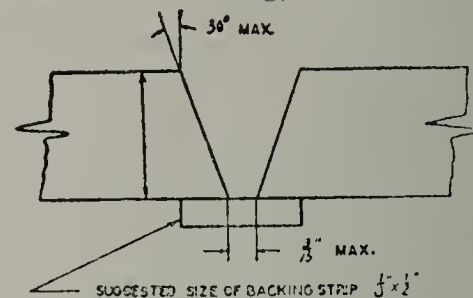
(a)—Butt Joint for Plate $\frac{3}{8}$ In. Thick
